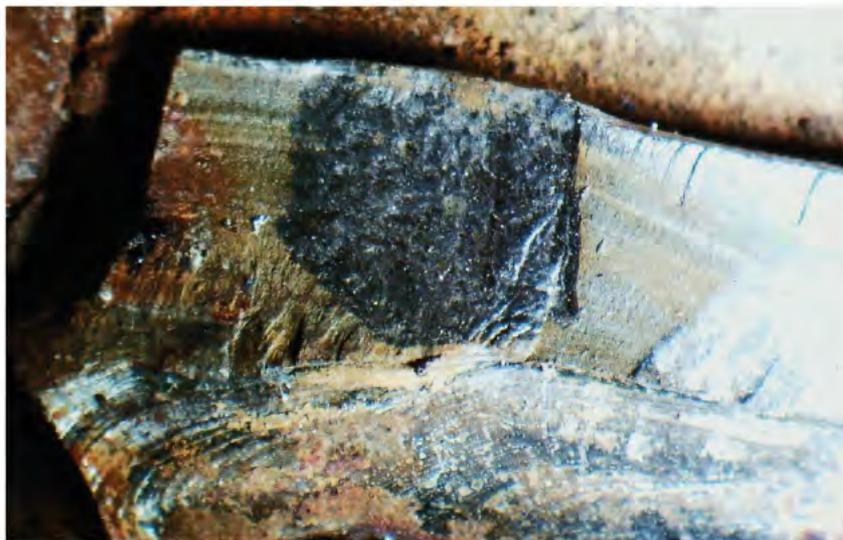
Higher magnification view of the worn patch of stiffener fracture surface at position 8.
